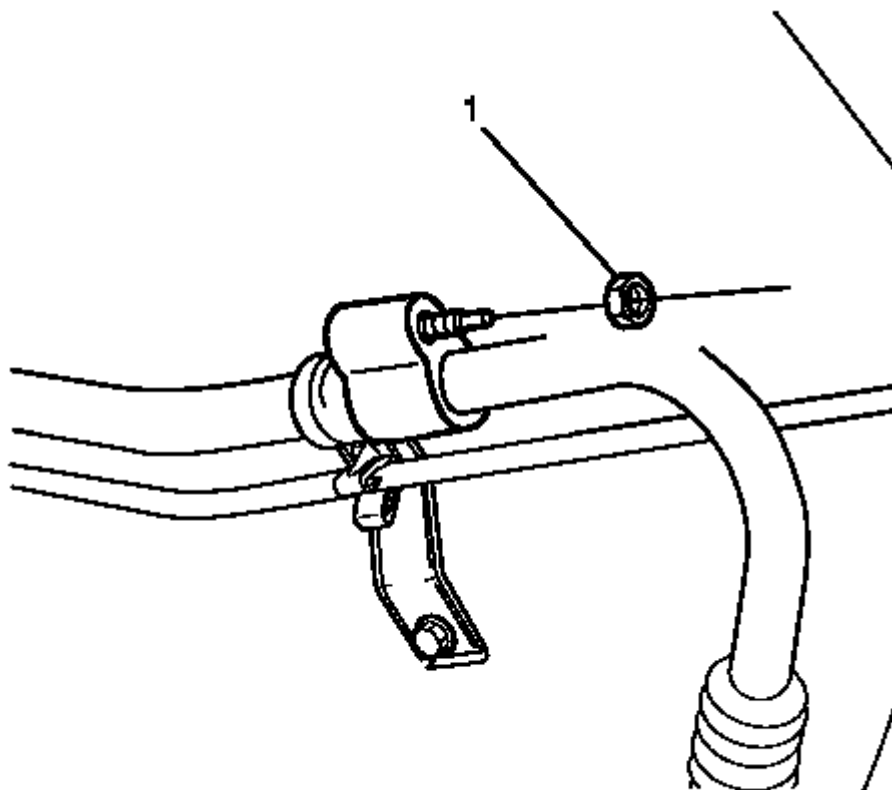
Identifying A/C Suction Pipe Pad To Lower A/C Suction Pipe Retaining Nut
